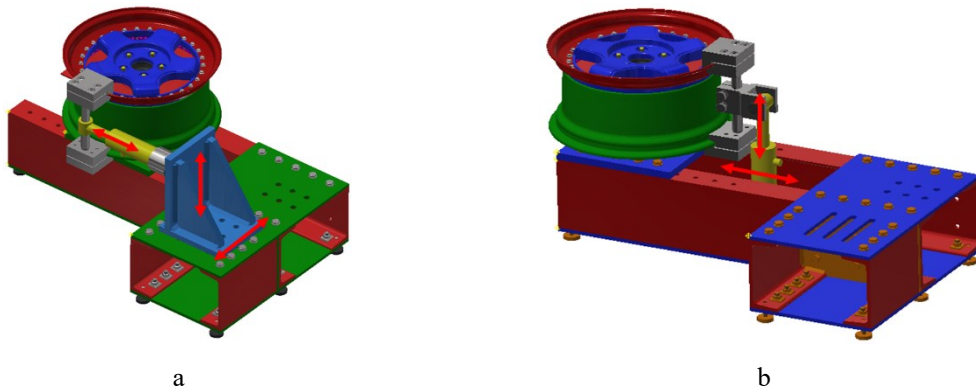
Scheme of the testing of the torque load (a) and axial load (b)
